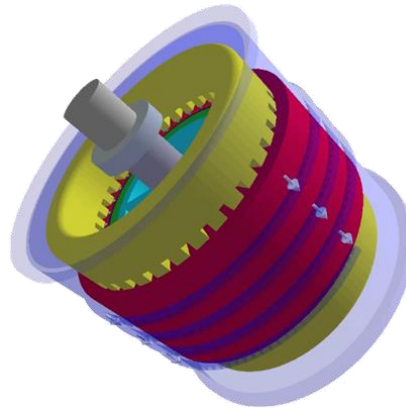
36/6 inner rotor configuration 3D view with transparent housing
